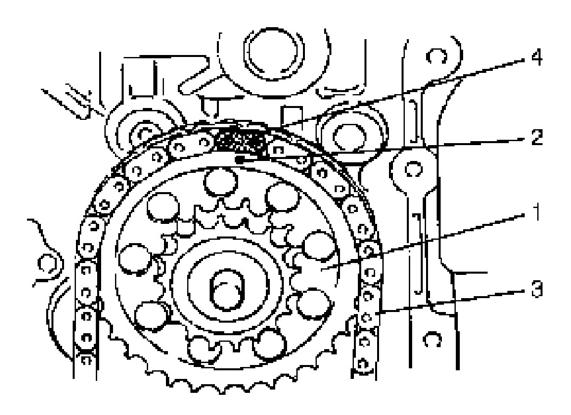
Identifying Match Mark On Idler Sprocket Courtesy of SUZUKI OF AMERICA CORP.
